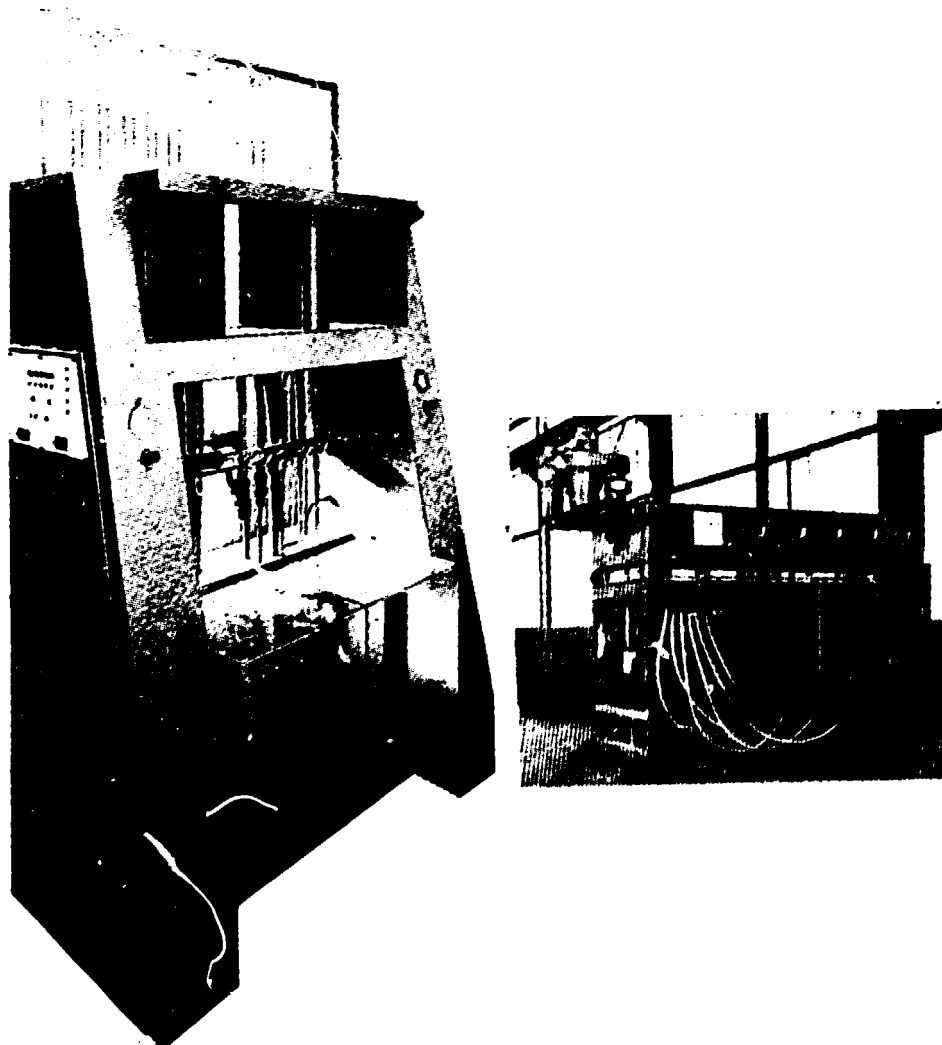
Automatic belt type weighing machine (glue/chip blending)
